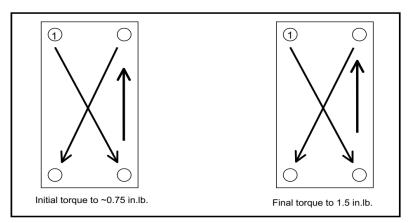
Bolting Pattern and Torque Specifications for Mounting a Butterfly Module
